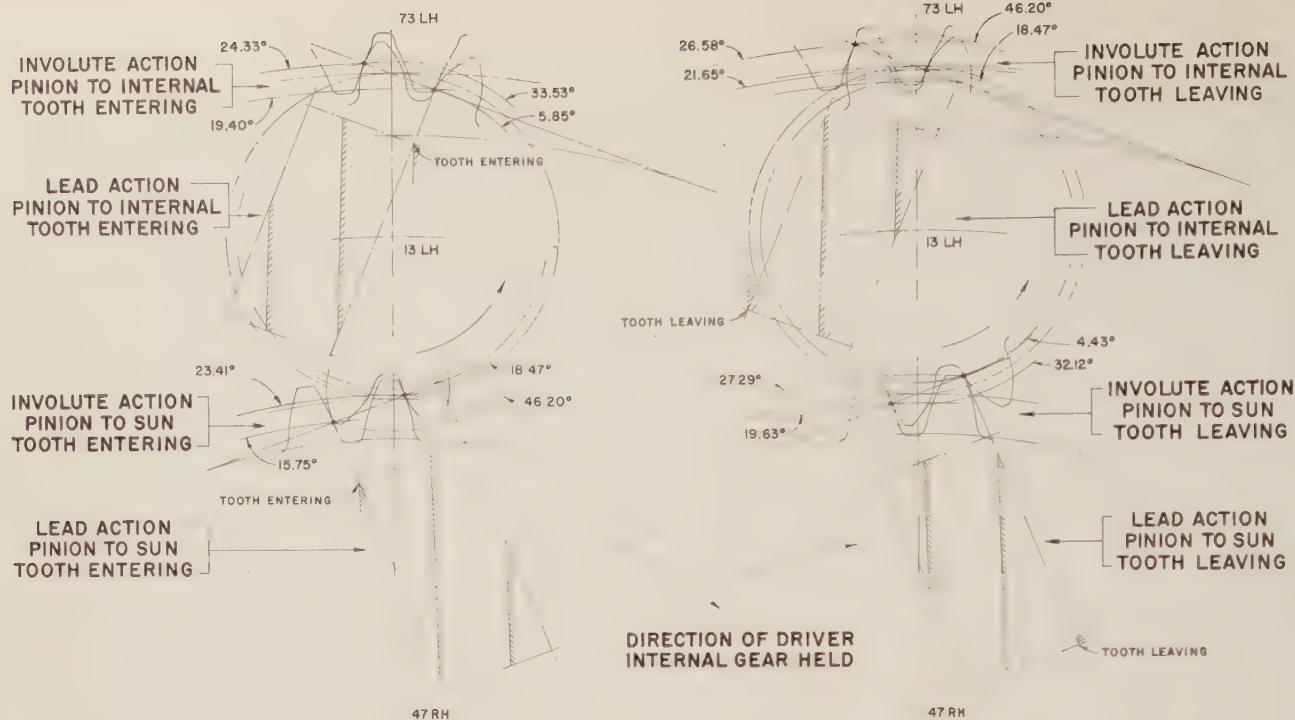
To insure smooth, quiet operation of a planetary gear set the pinion gears must be accurately spaced on a circle concentric with both the sun and ring gears.
